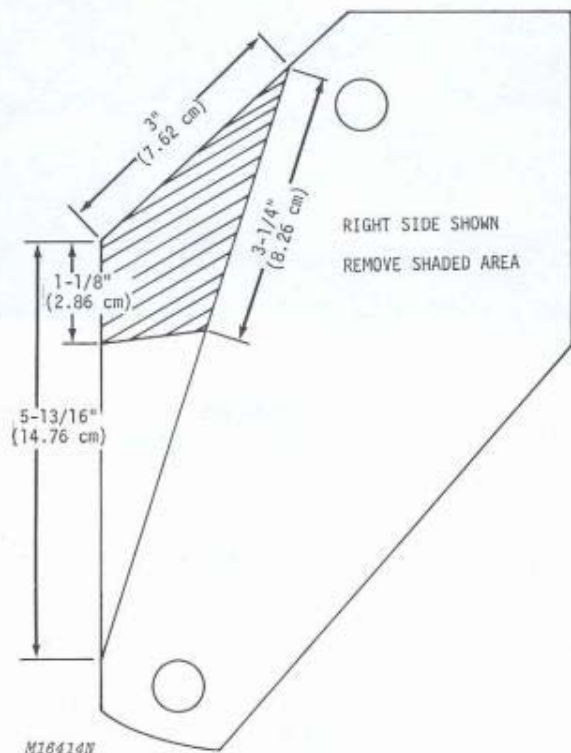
A-Area to be Trimmed from Front End Weight Bracket
